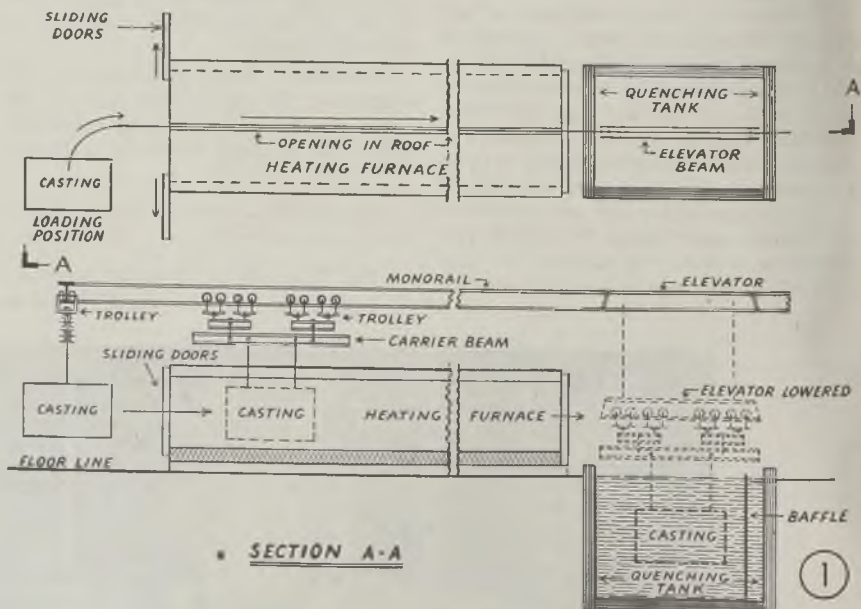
Schematic drawing of a continuous heat-treating furnace used by the General Steel Castings Corp. through which the castings are carried on a monorail conveyor
